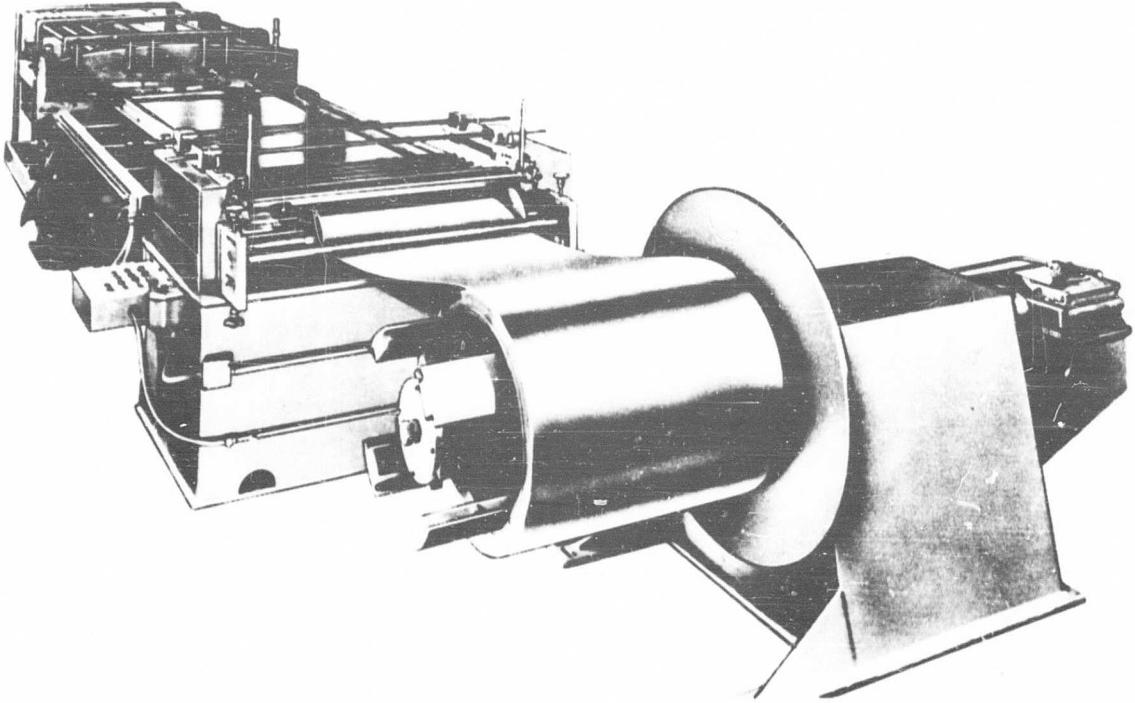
Coil shearing and stacking line. (Photo courtesy Dahlstrom Machine Works, Inc.)
